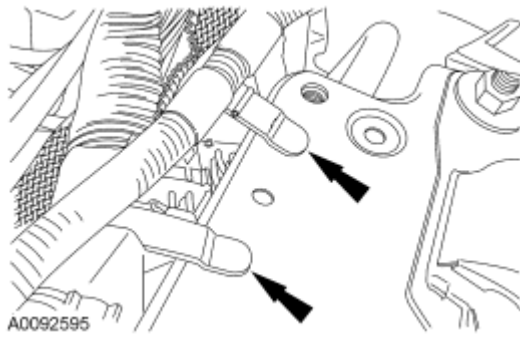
Locating Positive Battery Cable Pin-Type Retainers
